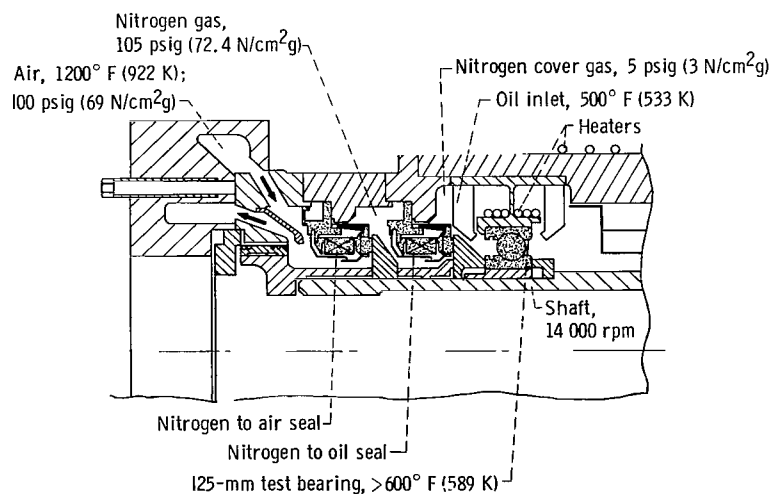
Bearing and seal assembly in simulated engine sump, inerted lubrication system.
